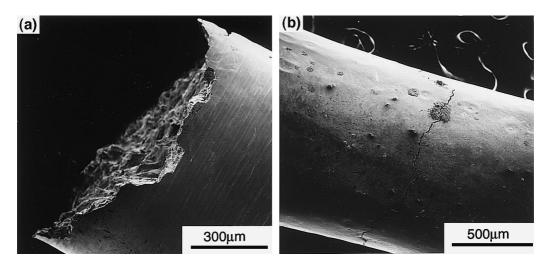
Cracks nucleated in the gage section of (a) as-machined and (b) electropolished specimens.
